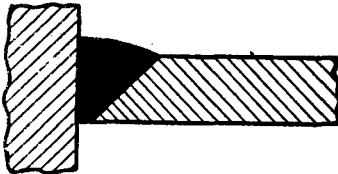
SINGLE-BEVEL BUTT WELD
